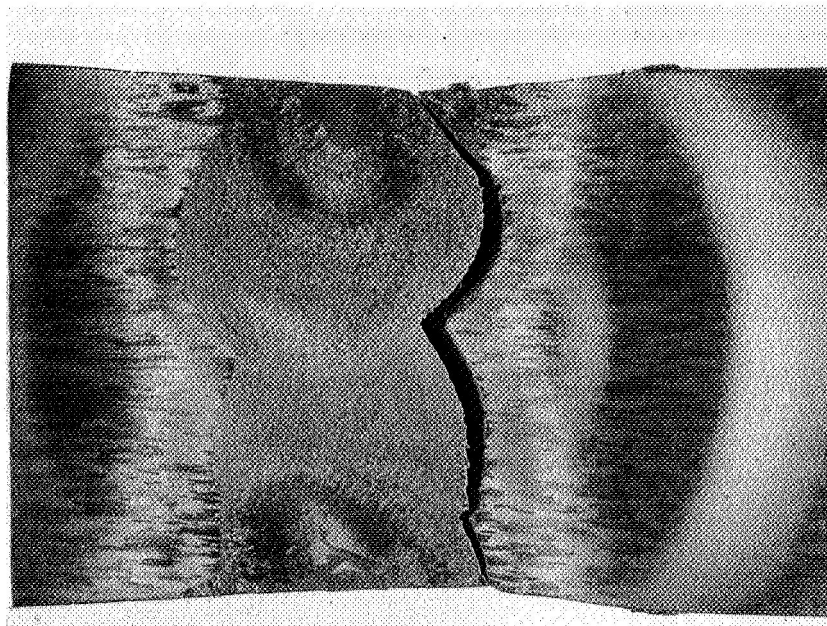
Macrosection through the Center of a 1-Inch Thick Al 2021-T81 Welded Tension Specimen
